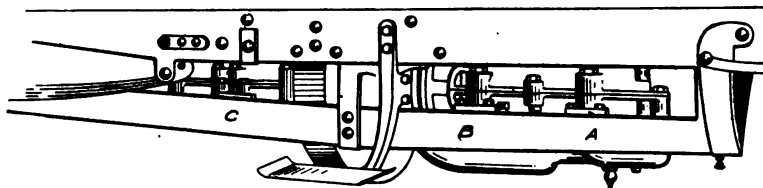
Frame Weakened by Excessive Riveting in Parts Subjected to Heaviest Weight.
